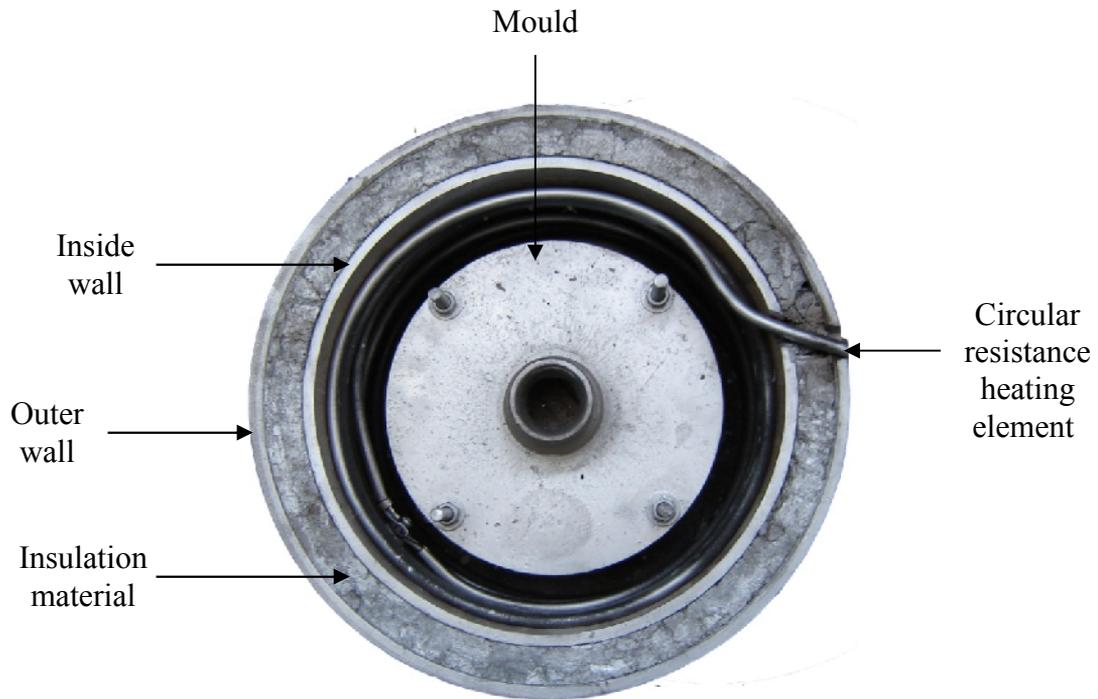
Photograph of heating unit of centrifugal casting set-up.
